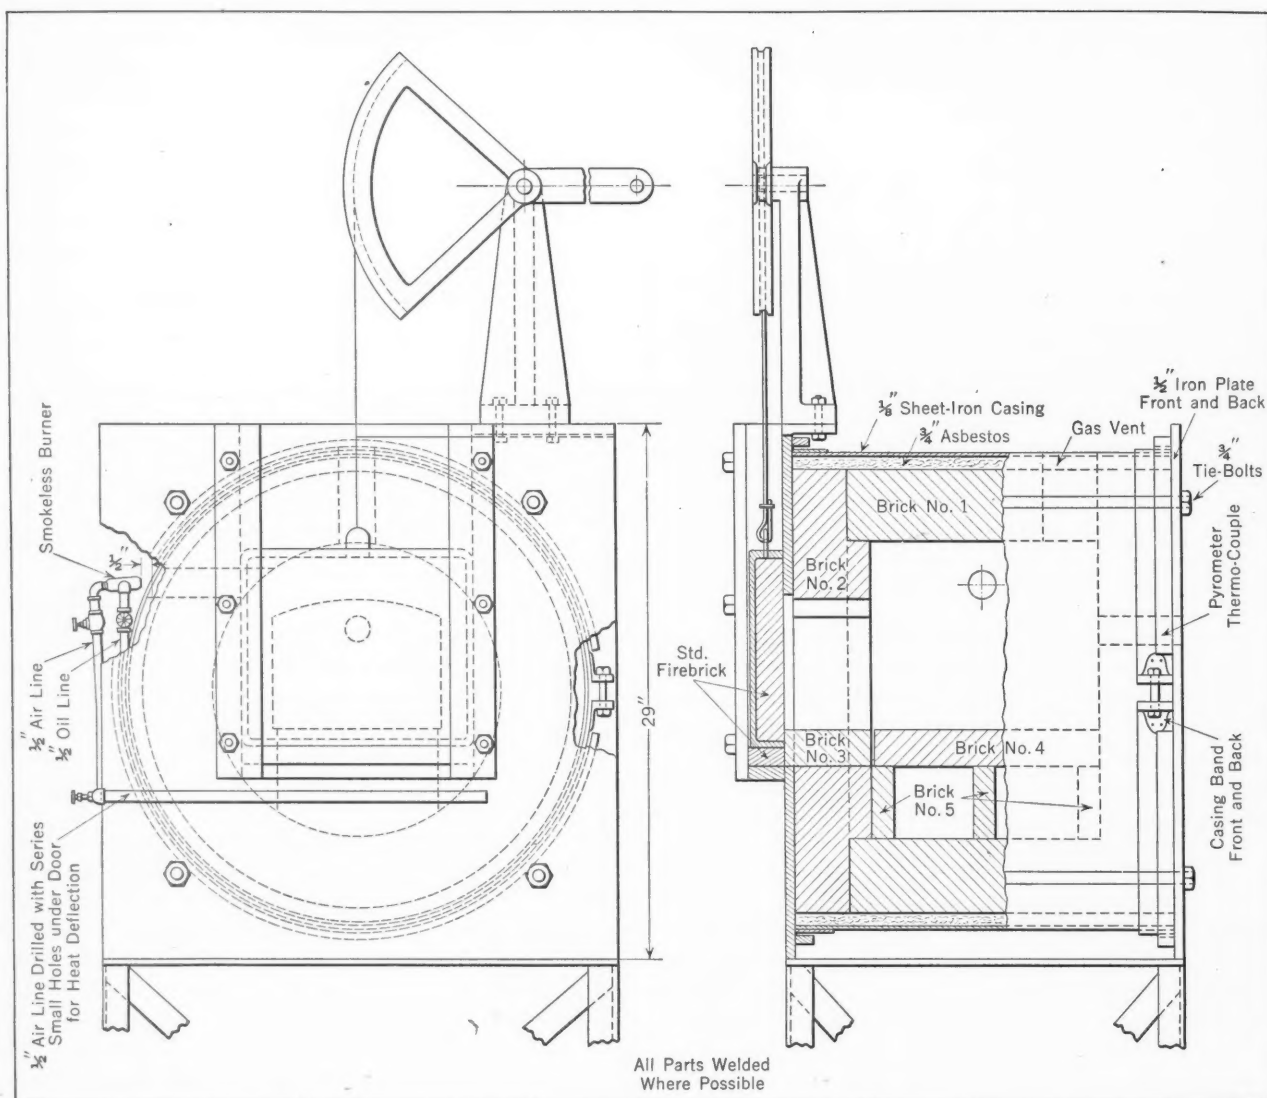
Construction of Furnace Used in Heat-treating Tools for Turning Car Wheels in a Wheel Lathe
